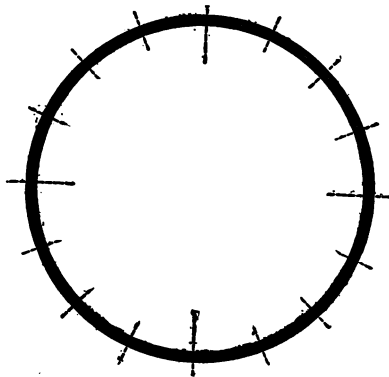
Showing the relative position of rivet holes in the large and small ends of joints where connected
